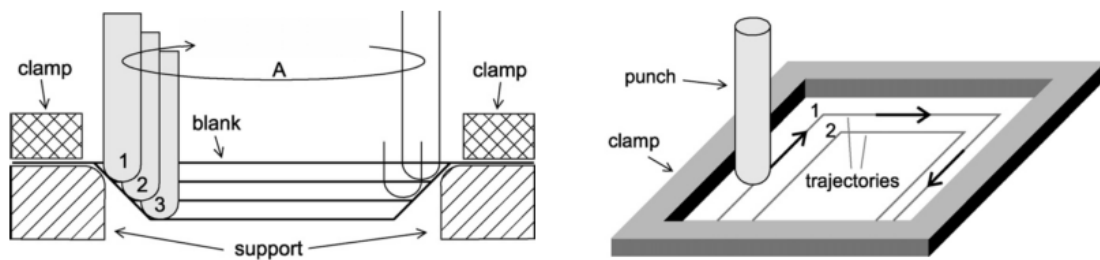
Schematic of SPIF on CNC milling machine [33]
